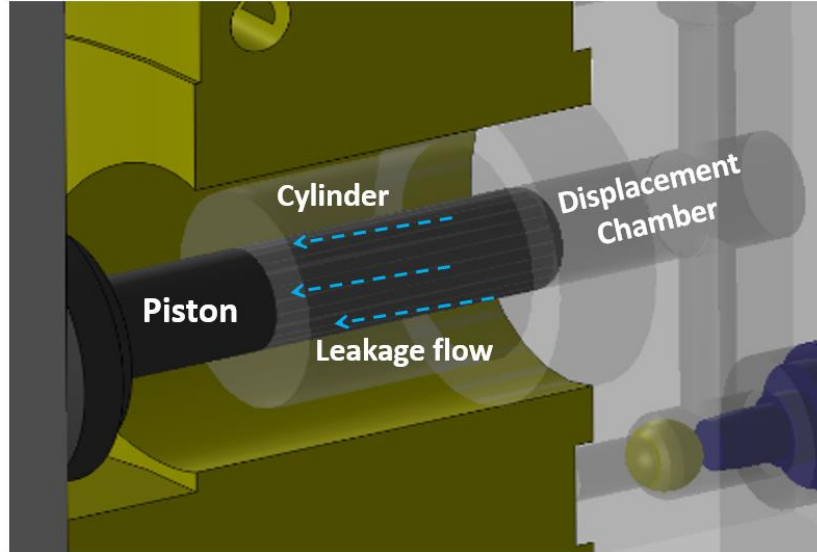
Illustration of the piston/cylinder interface of a radial piston pump unit and the leakage across this interface.
